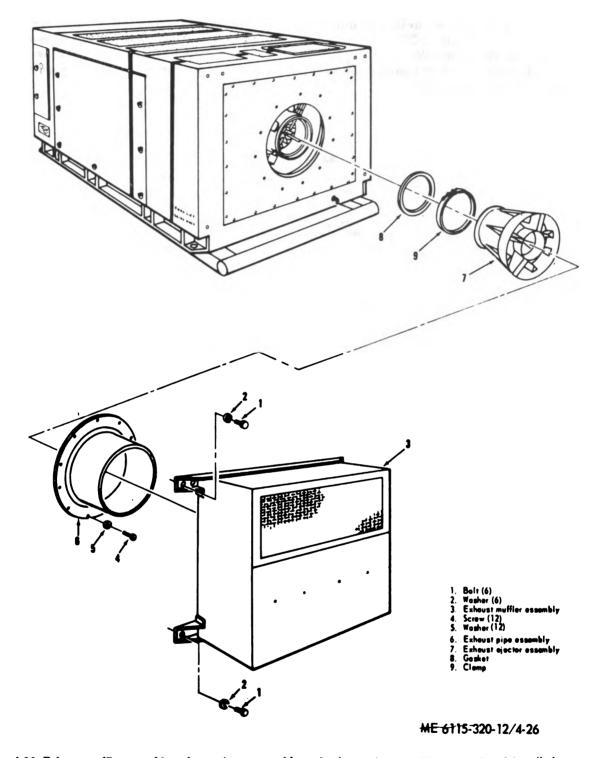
Exhaust muffler assembly, exhaust ejector assembly, and exhaust pipe assembly, removal and installation.
